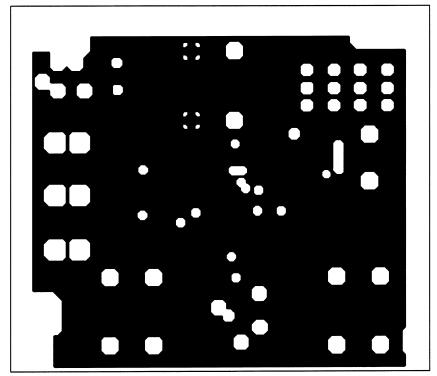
Recommended LQ PC Board Layout: Component-Side Layout
